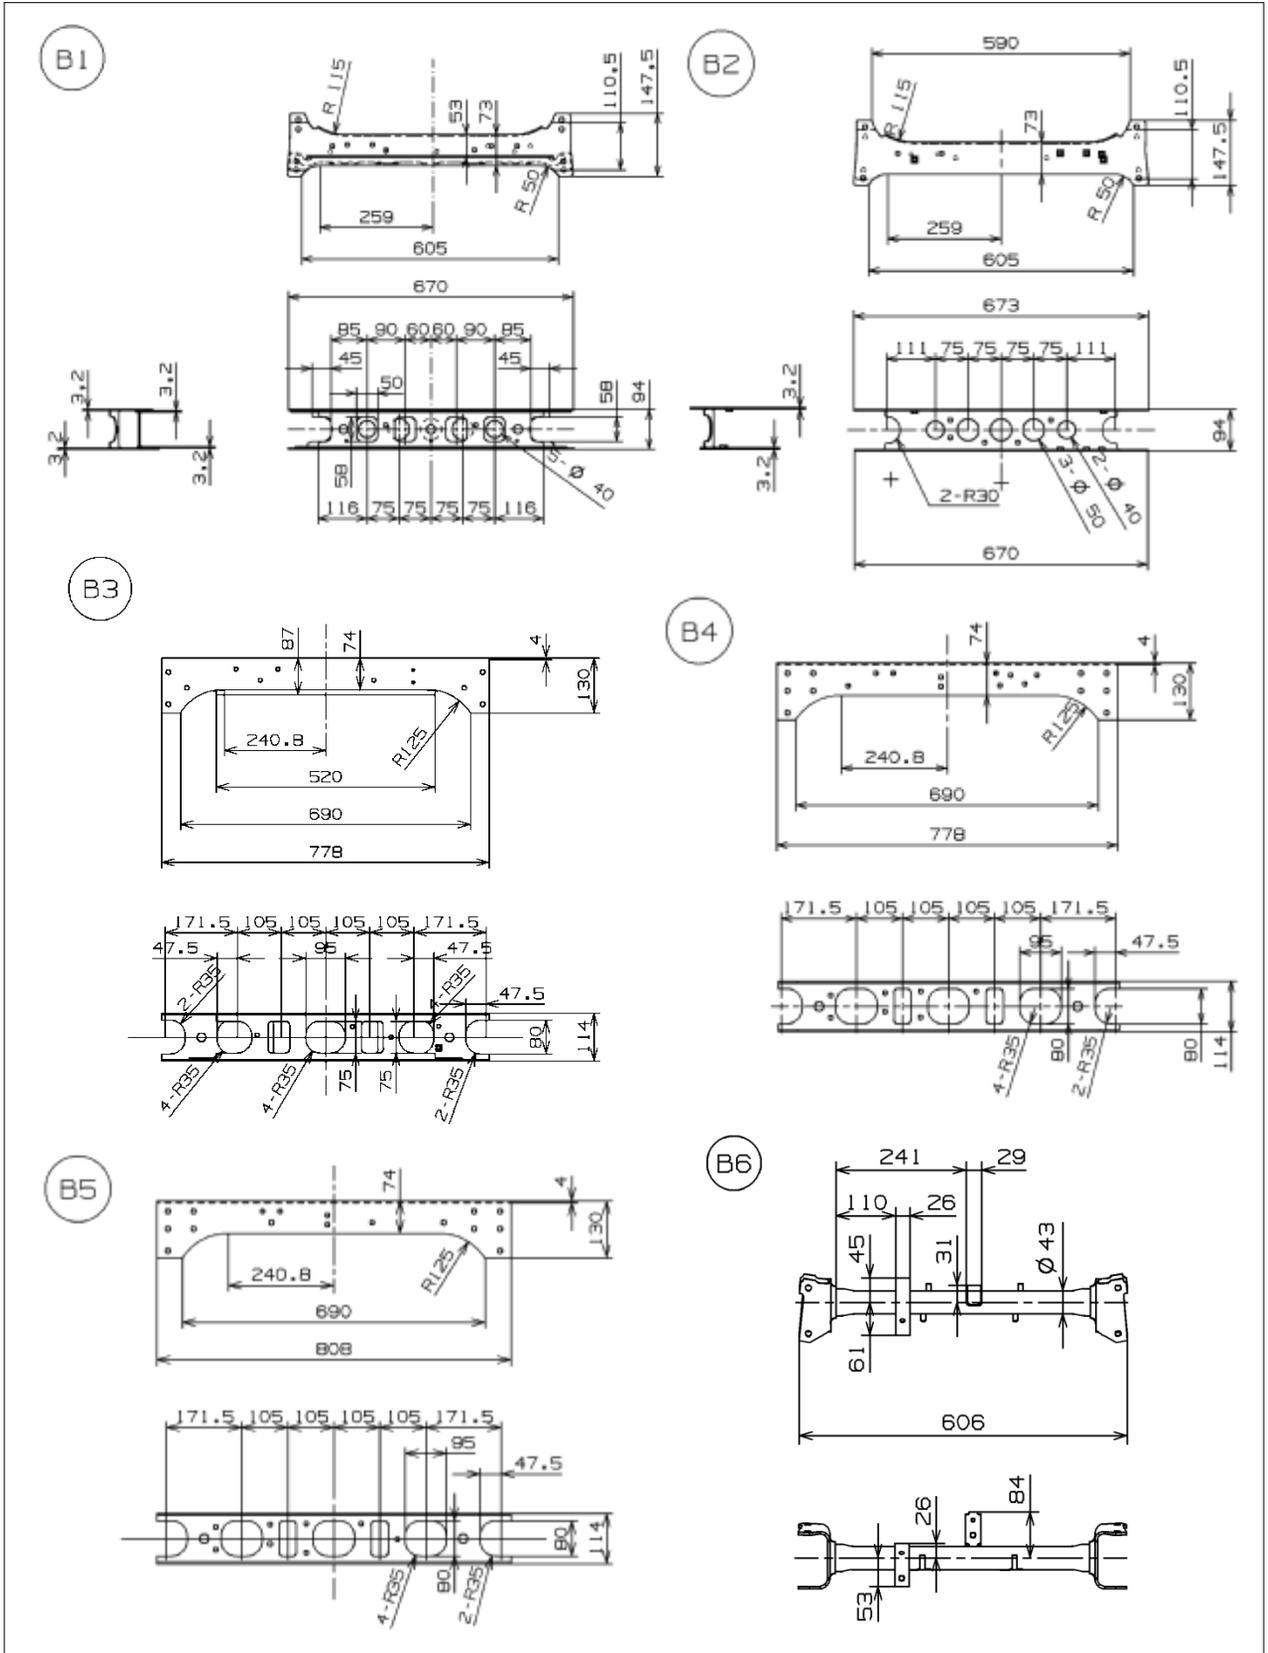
Chassis Frame Drawing NPR75L/U-ML5VWYE
